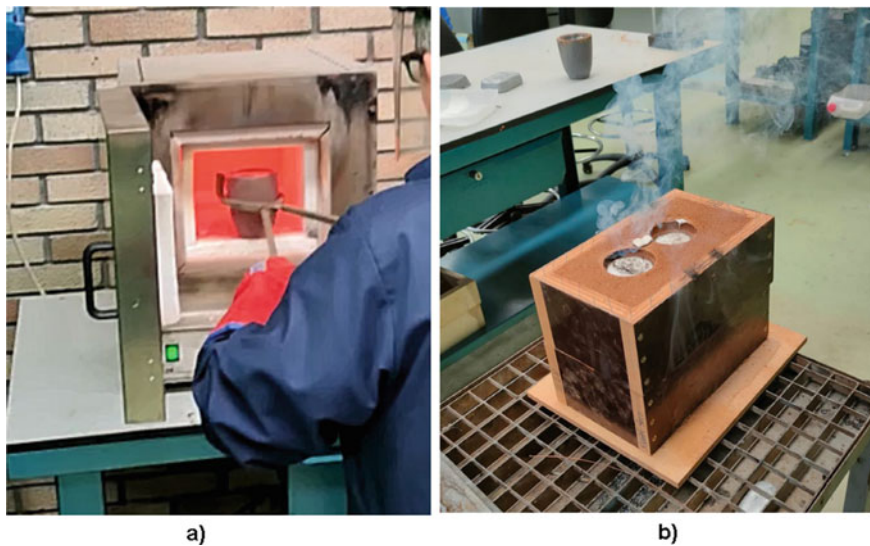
a heating of pot with aluminum. b Aluminum melted into the mold
